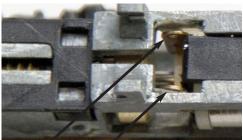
Ensure tape is properly insulating the frame from the motor tab.
